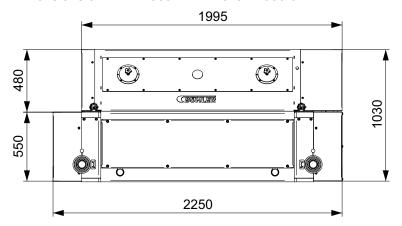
Dimensions of DFZL-1000 with 3 roller modules
